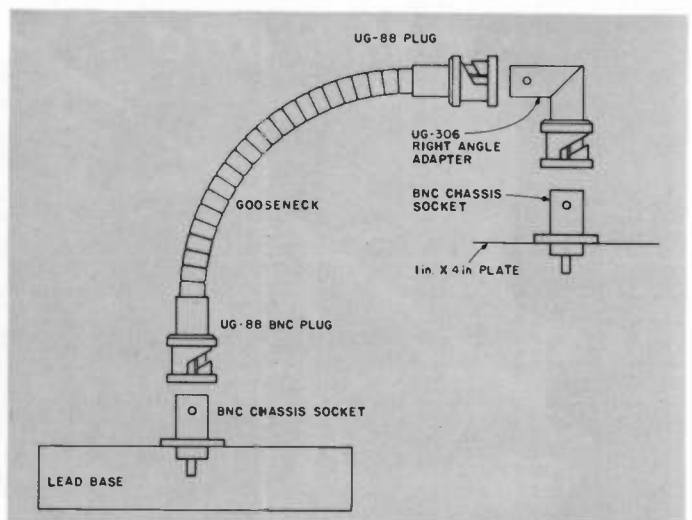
Simple assembly of the holder using BNC connector hardware.
